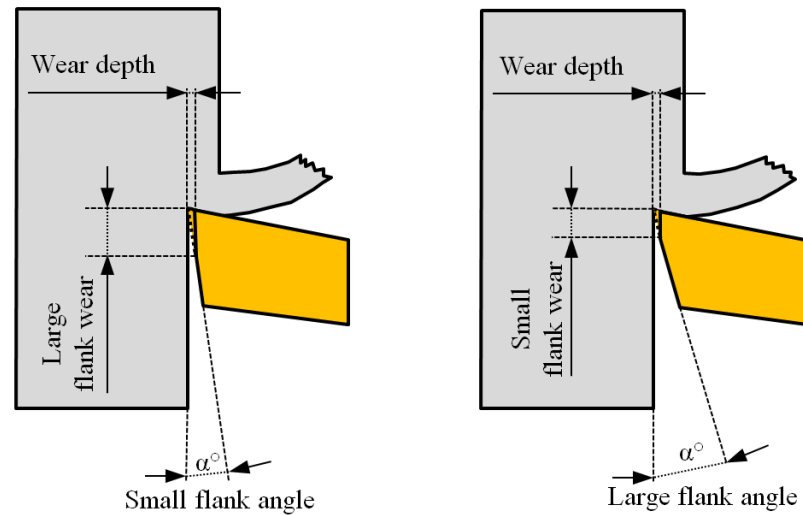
Flank angle relating to flank wear (Mitsubishi Materials Corporation, 2013)
